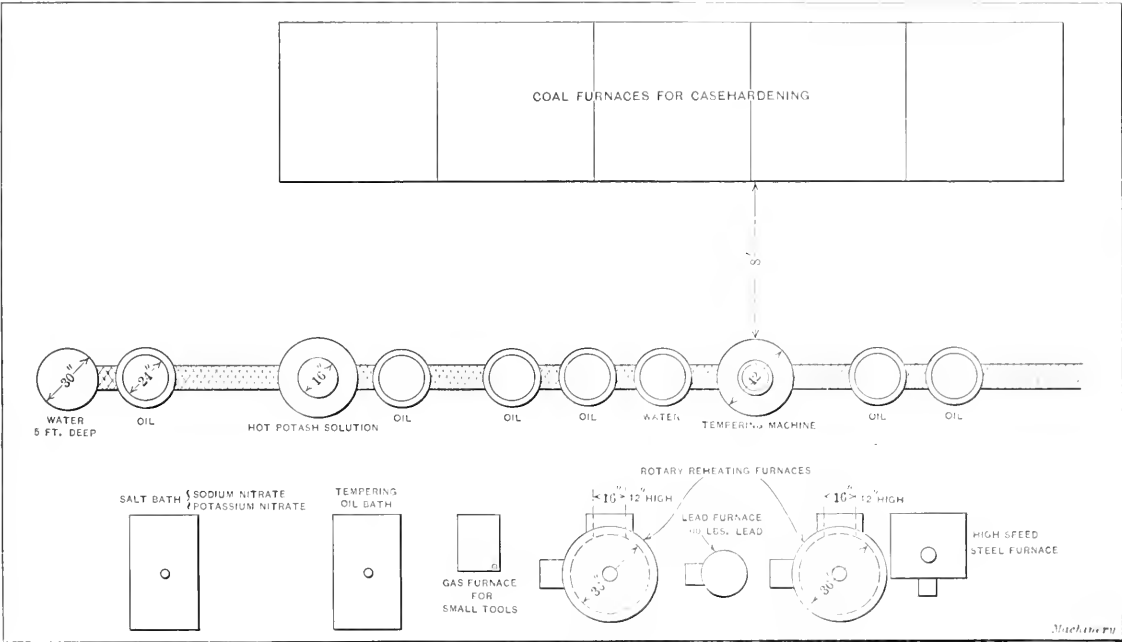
Plan of Gear Hardening Department—Gleason Works
